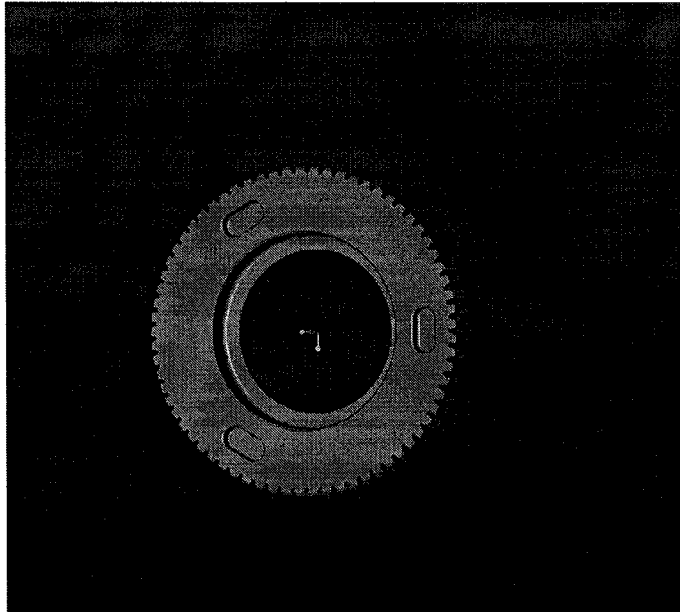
38 Three Grooves Milled to Hold the Iron Club
